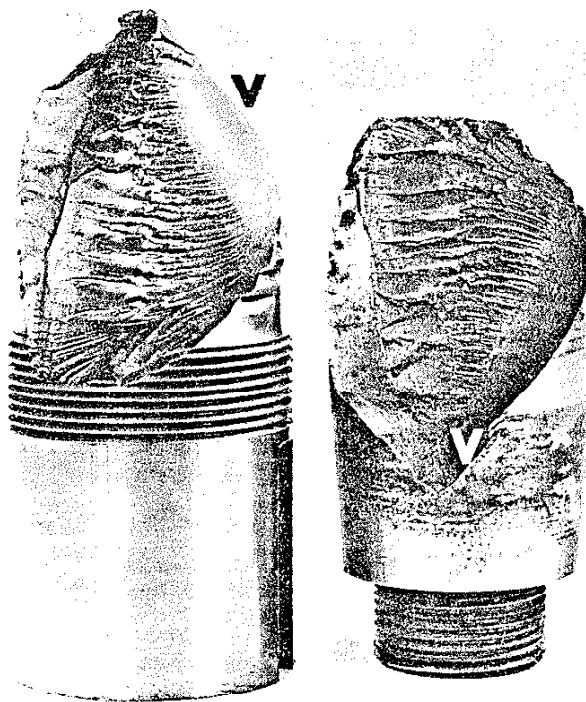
Torsional Fatigue Failure at Front End of Crank Shaft.
